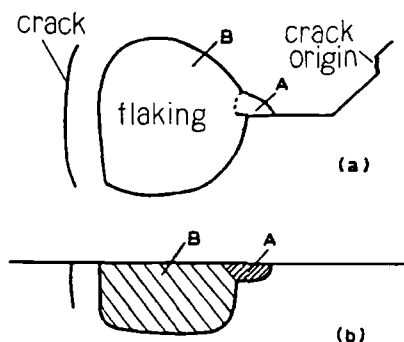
Schematic drawings of (a) the appearance from the surface and (b) a cross-sectional view of surface-originated flaking.
